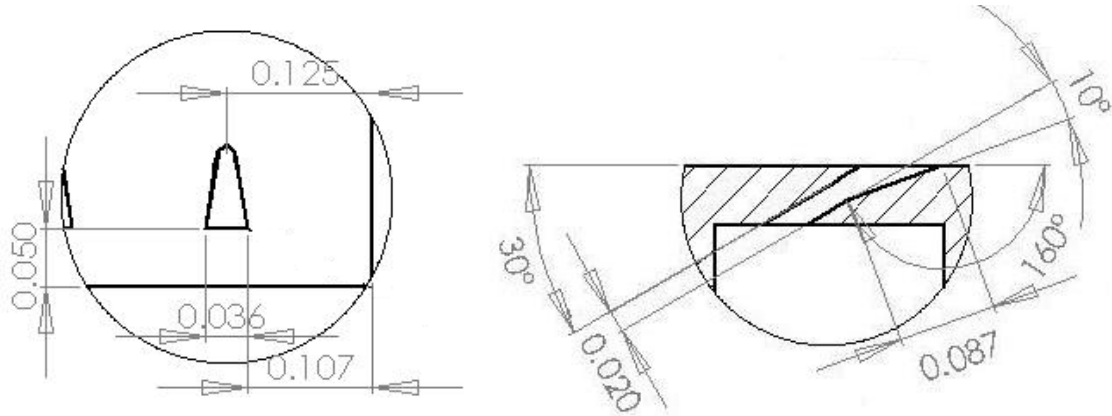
Drawing detail of fan-shaped laidback cooling hole geometry (inches)
